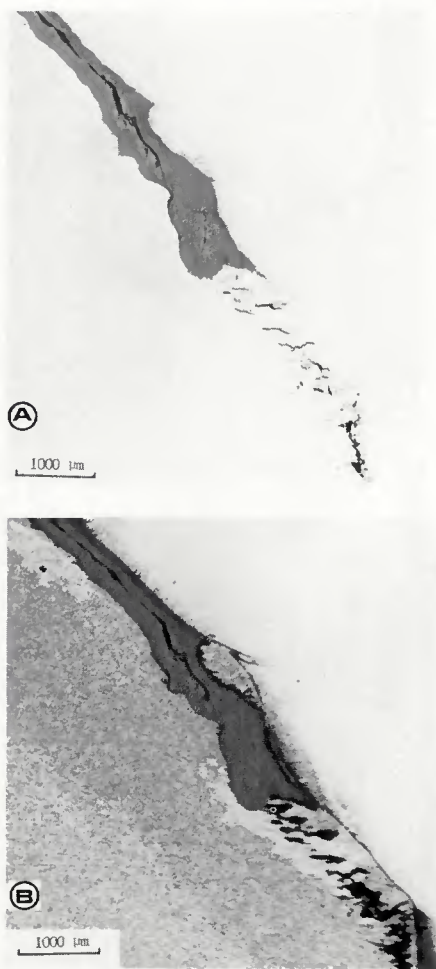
Cracks in a dissimilar-metal weld between an austenitic stainless steel tube and a $2\frac{1}{4}$ Cr-1 Mo steel tube with Type 309 stainless steel filler metal (the weld was in service near 560°C , i.e., 1040°F , for over 50,000 h). A—etched; B—etched in 2% nital
